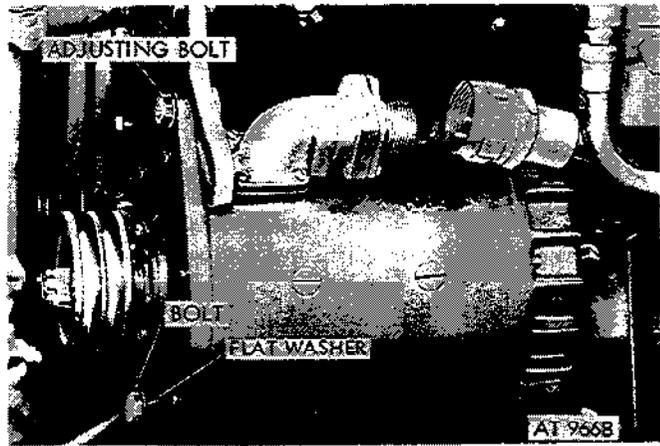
Remove adjusting bolt from adjusting arm and generator.
